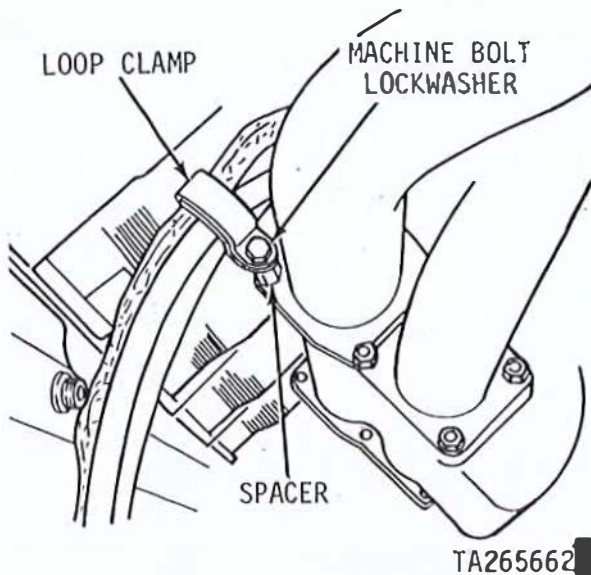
Removing or installing wiring harness loop clamp.
